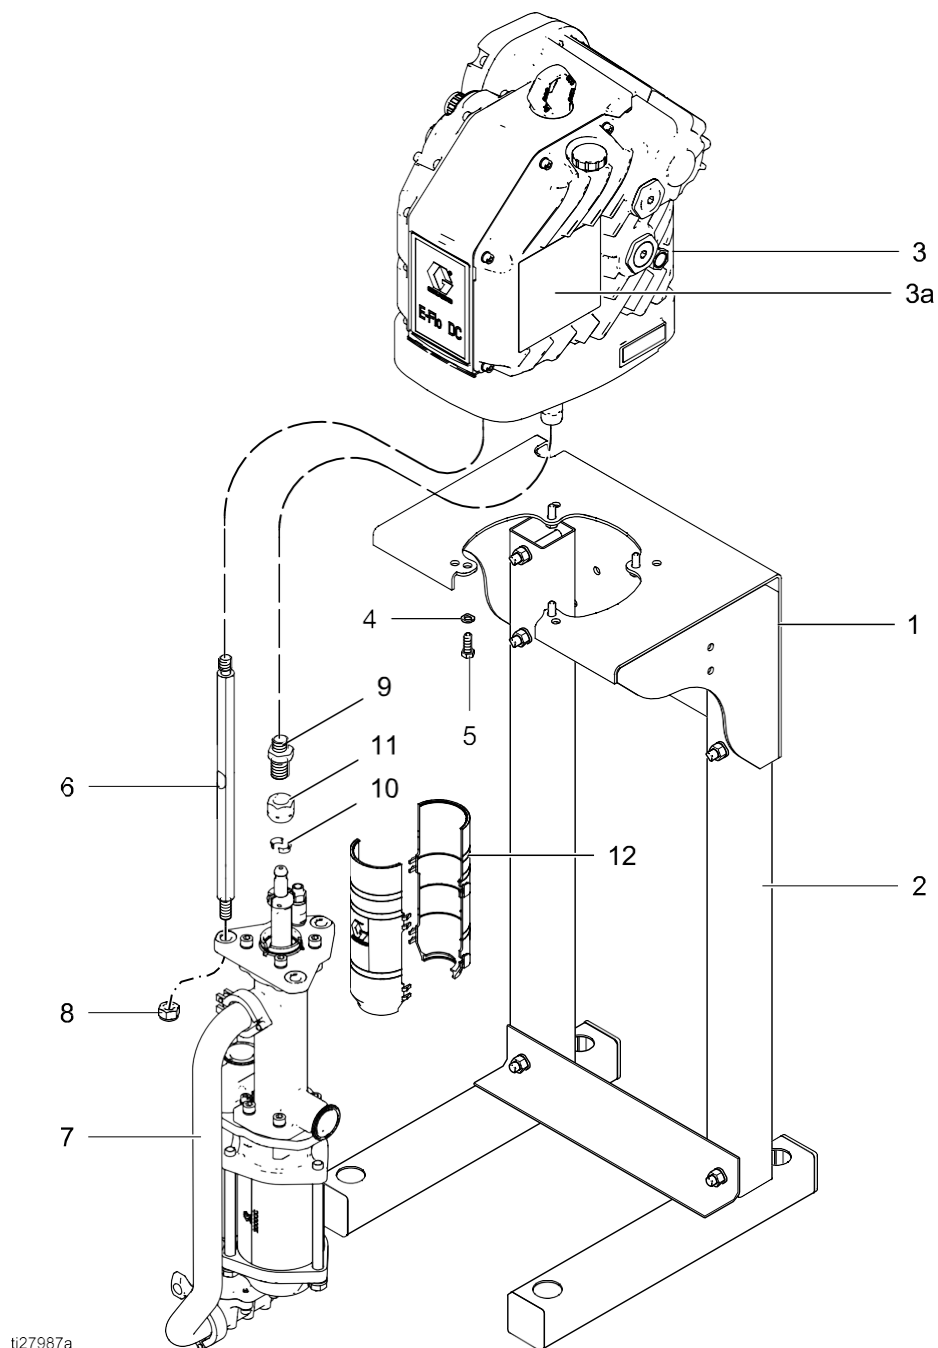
Pump Assembly: Lower with Open Wet Cup Shown
